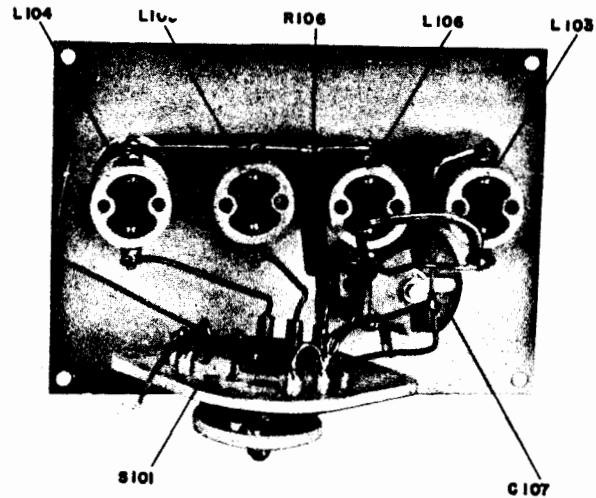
Transmitter Exciter Plate Tank Assembly, Top View
